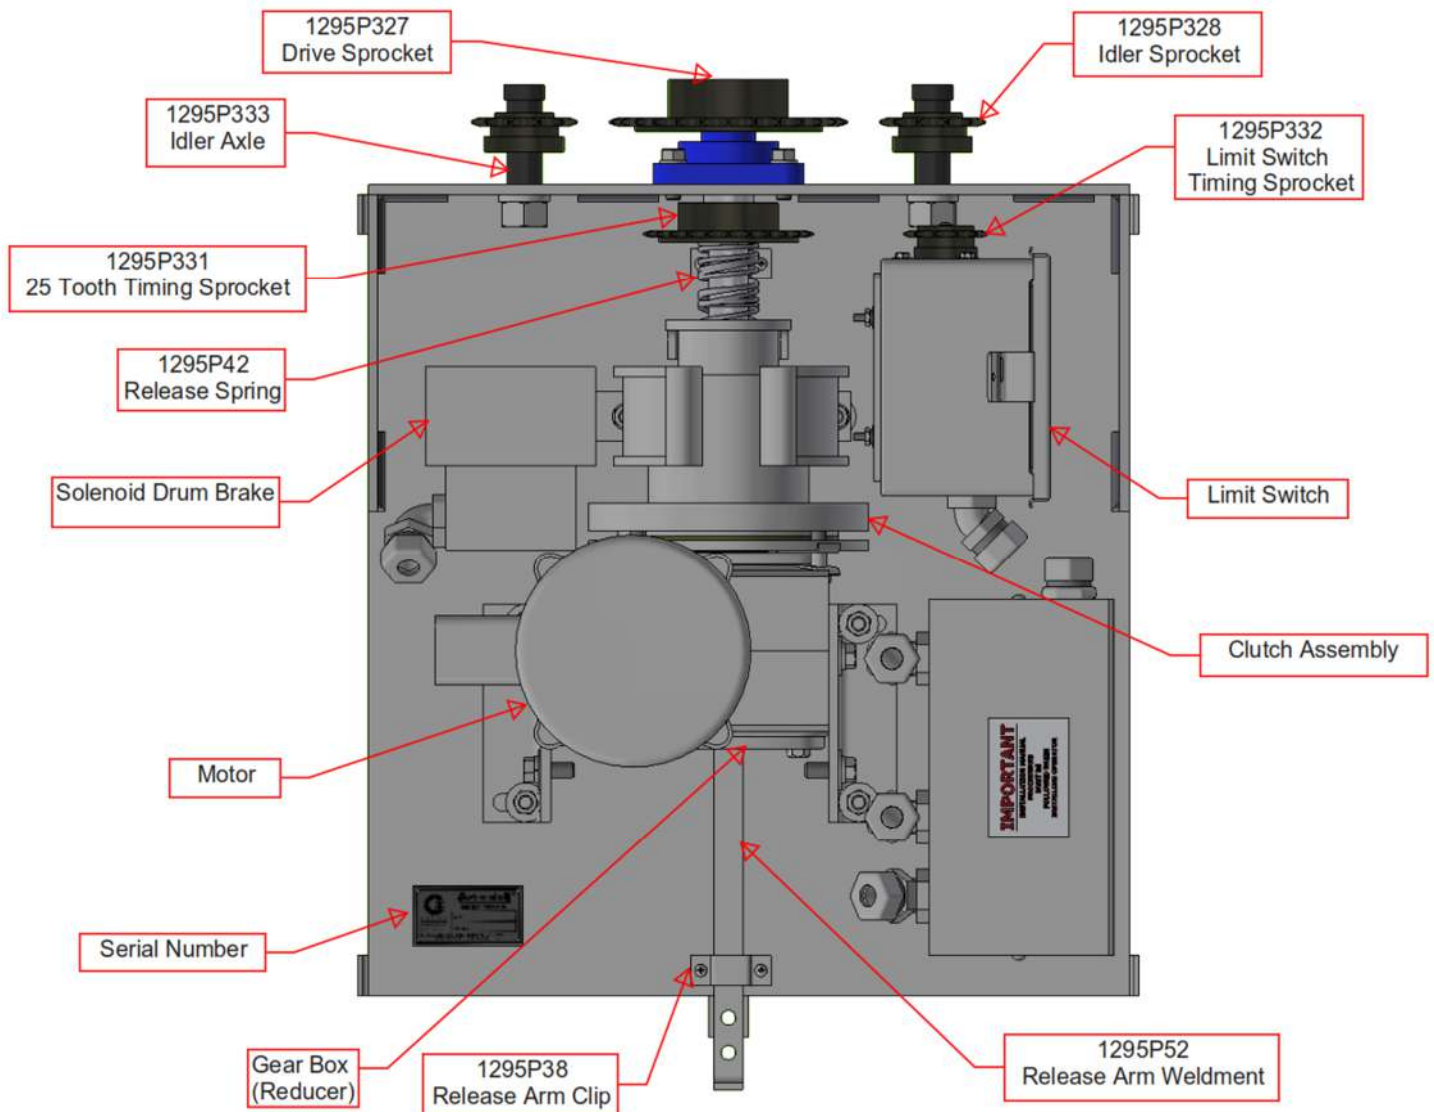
Illustration of Parts: Plan View of 1295 Operator
